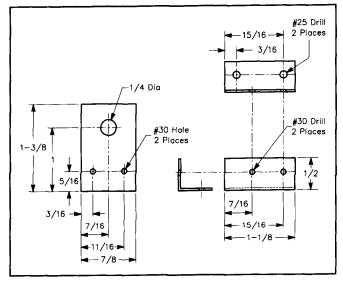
C1 mounting bracket is made from 0.062 X 1/2-in. aluminum angle or 0.062-in. aluminum sheet. The mounting insulator is made from 1/16-in. G10 circuit-board material from which the copper has been removed.
